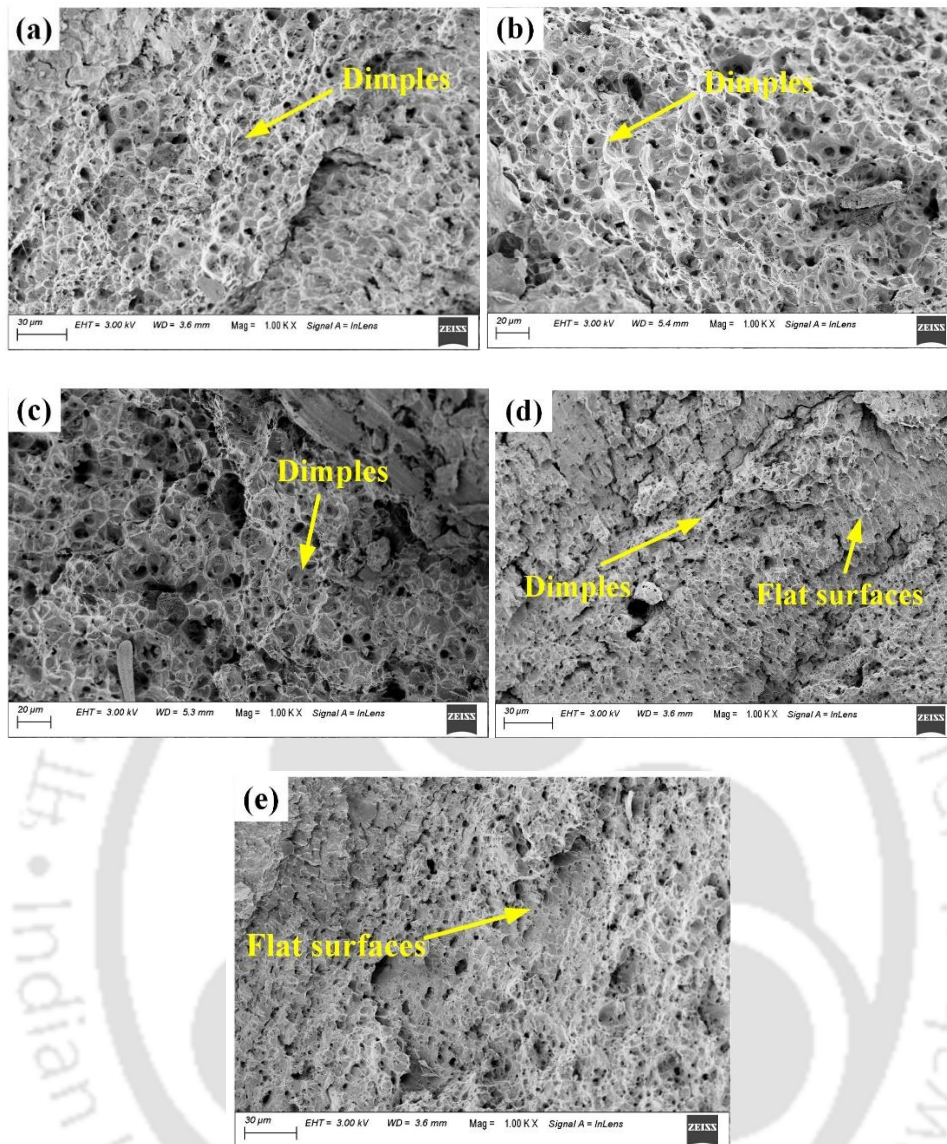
SEM images (1000X magnification) of fractured surfaces during lap shear test of FSSW joints produced by (a) pinless tool (b) tool with rigid pin (c) AA6061-T6 consumable pin (d) MS consumable pin (e) OHNS consumable pin
